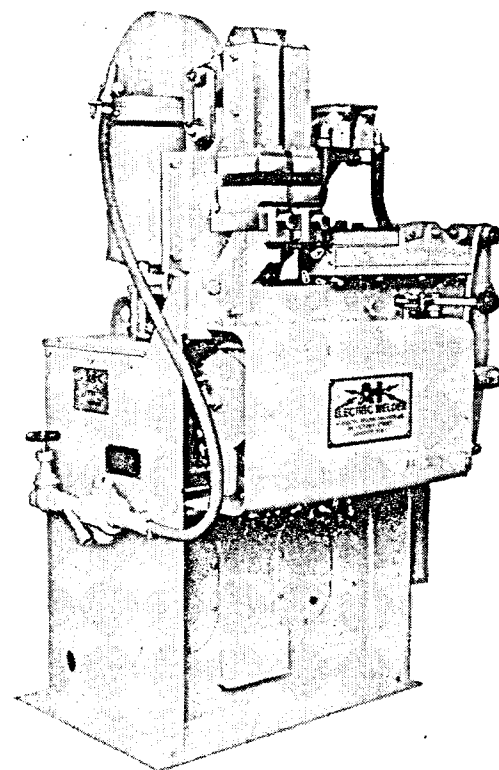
A.F.11 Automatic Flash Butt Welder.
